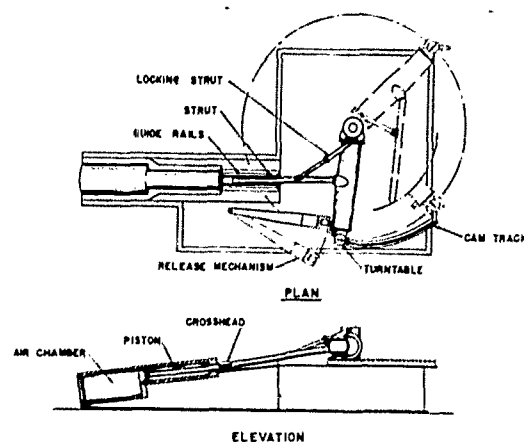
Plan and elevation of Rotary Accelerator as constructed, showing small (54-in. radius) arm. Arrows on turntable indicate axis of test specimen.
